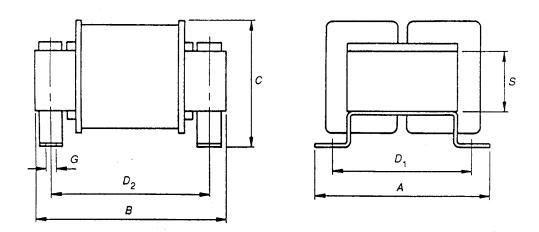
Level mounting style for transformers and inductors using laminations YUI 1-10 to YUI 1-80 – bracket mounting
